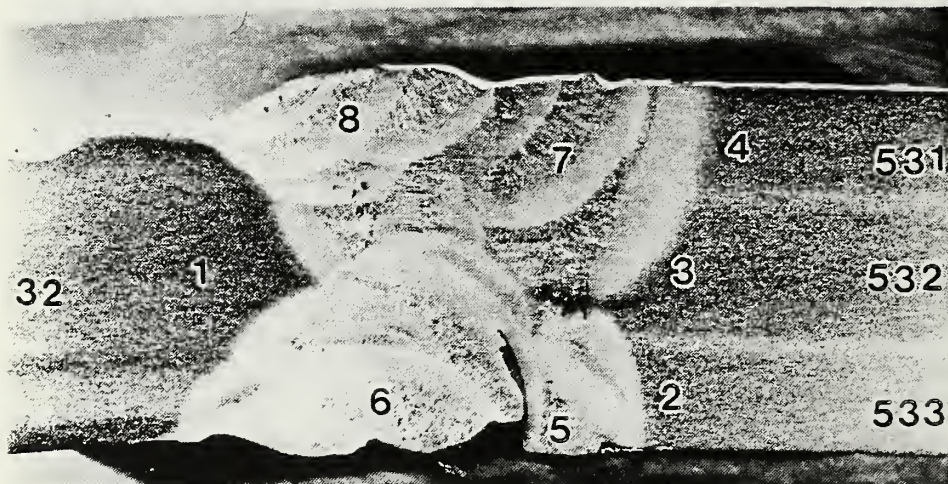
Location of Test Specimens from Vertical Weld
